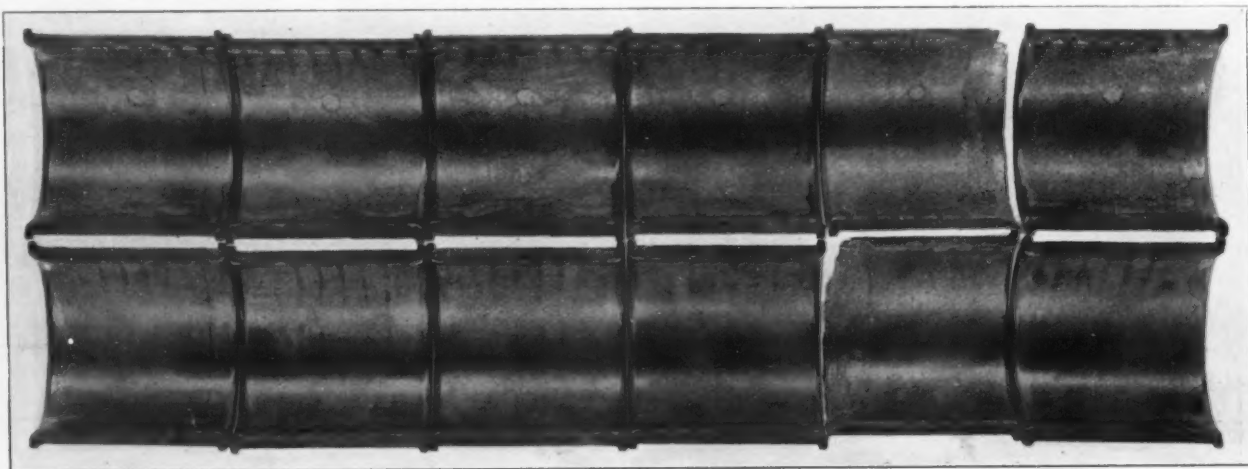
AN IMPROVED FORM OF CONNECTING-ROD BEARING
